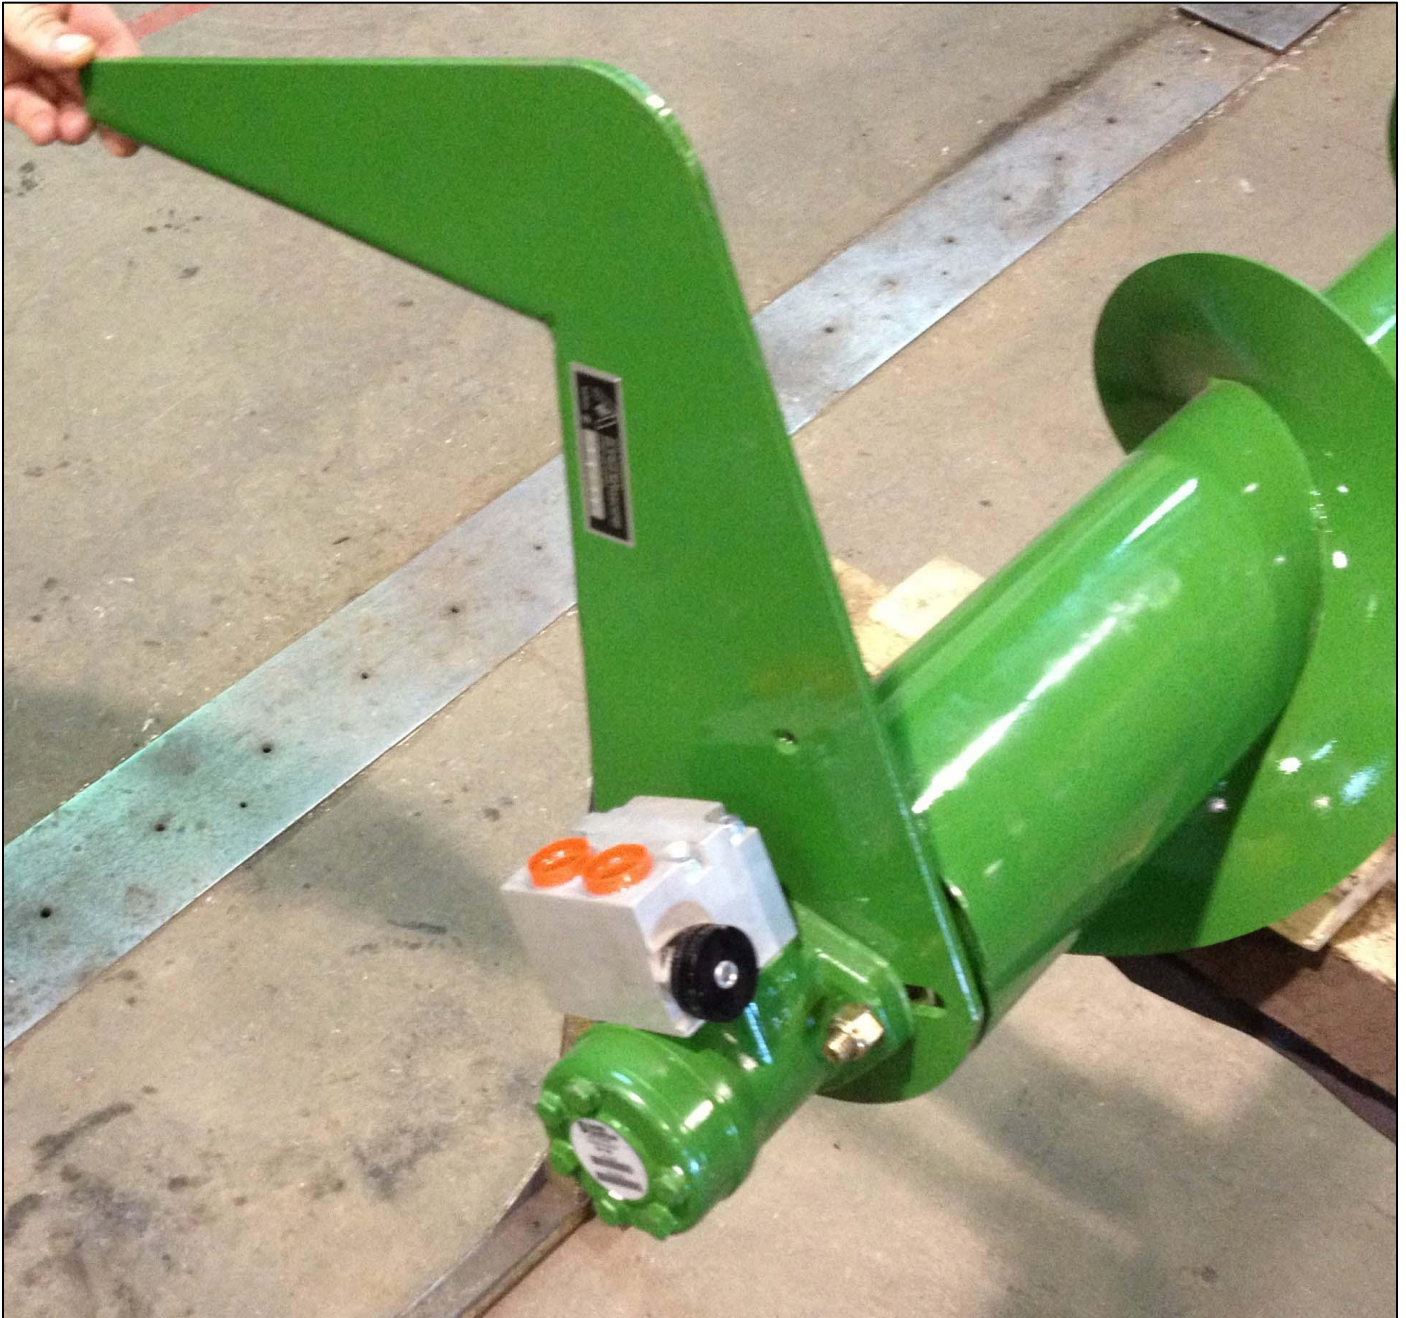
MOTOR DRIVE INSTALLED ON AUGER
